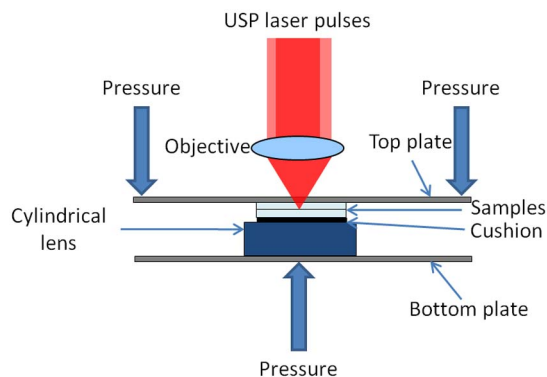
(Color online) Sketch of cross section of the fixture for USP laser welding and sealing.
